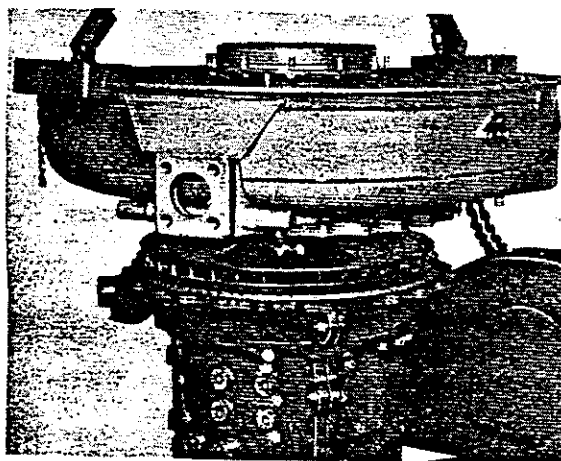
Lowering Diffuser Section onto Centrifugal Housing
